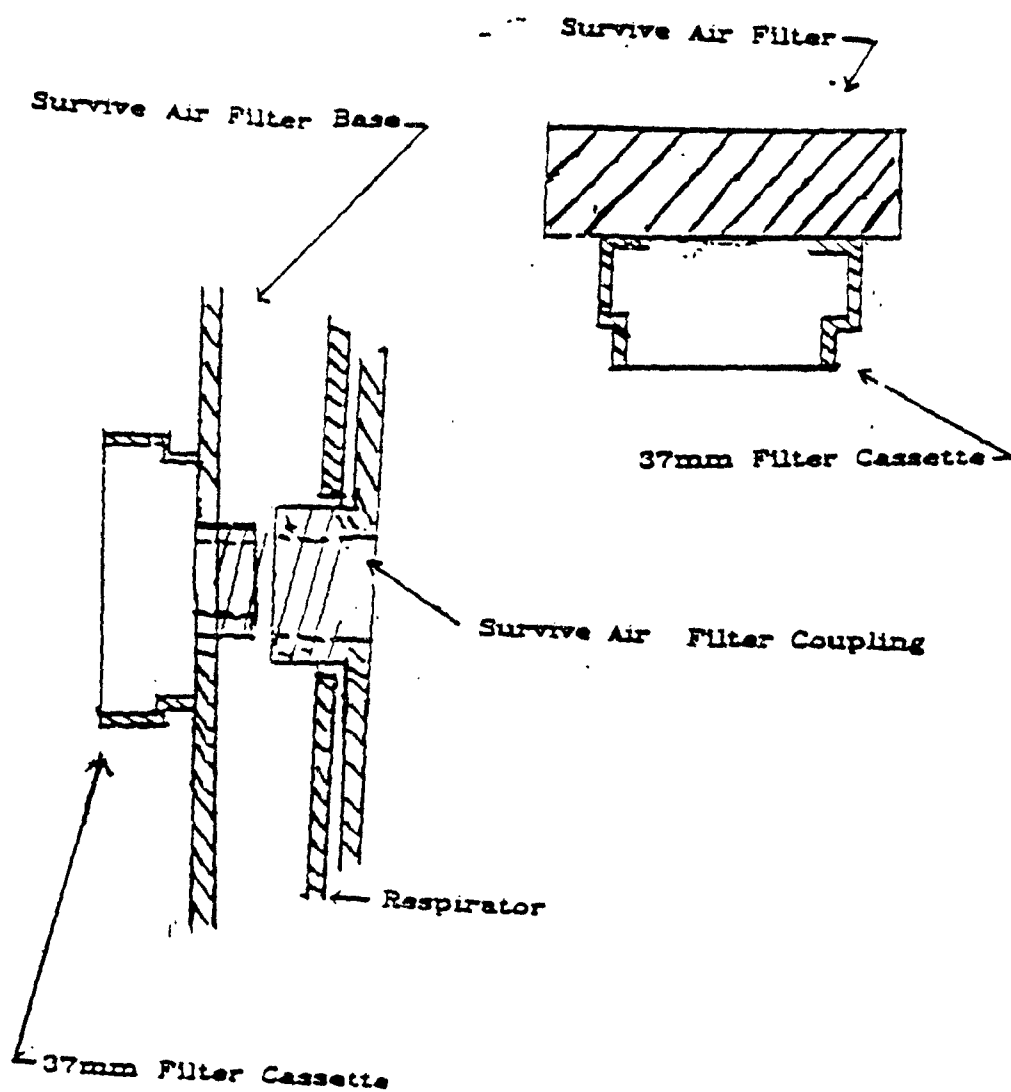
Coupling Used for the Attachment of Test Equipment to the Respirator.
